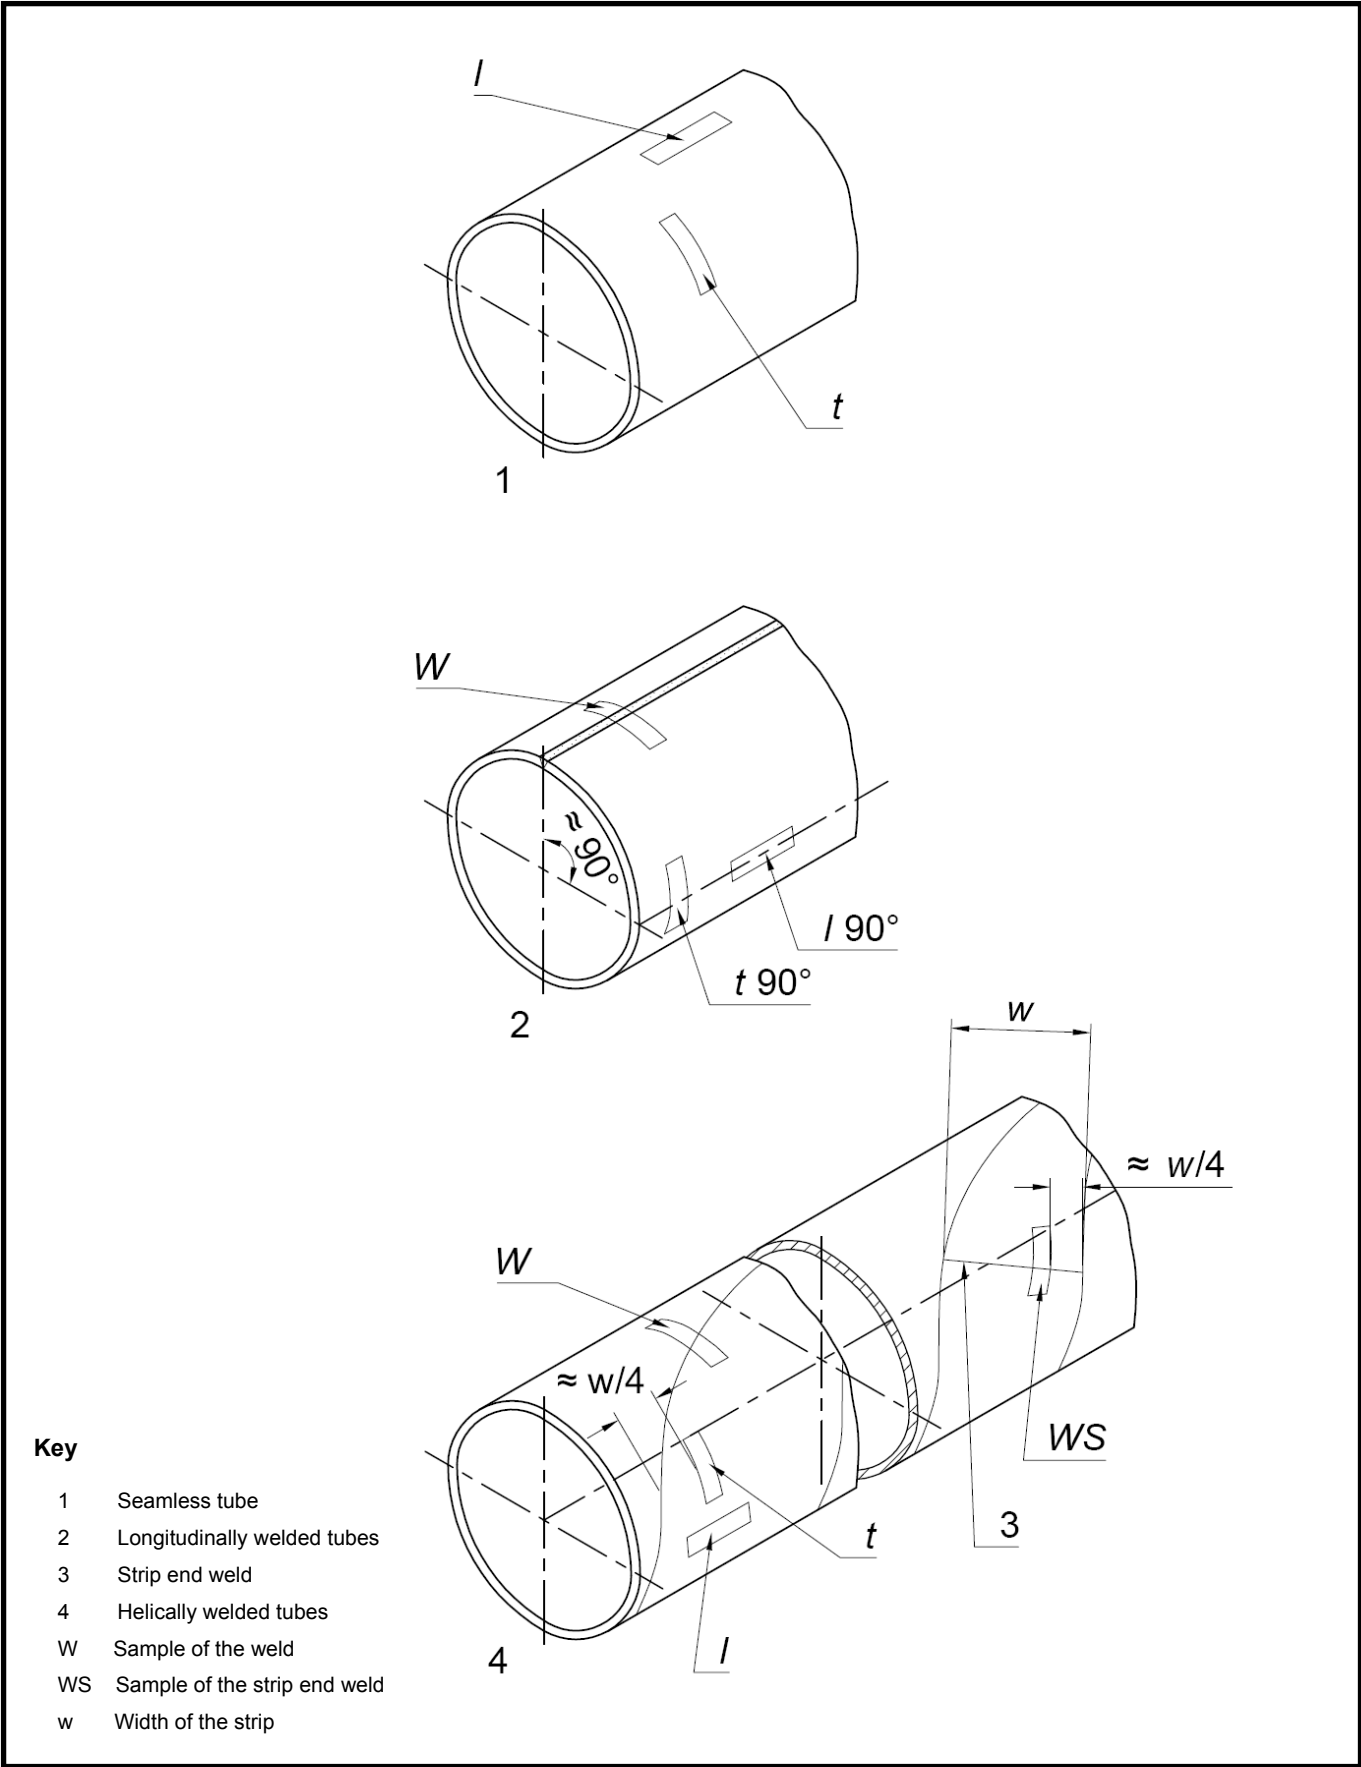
Location and direction of test pieces for the tensile and weld bend test
